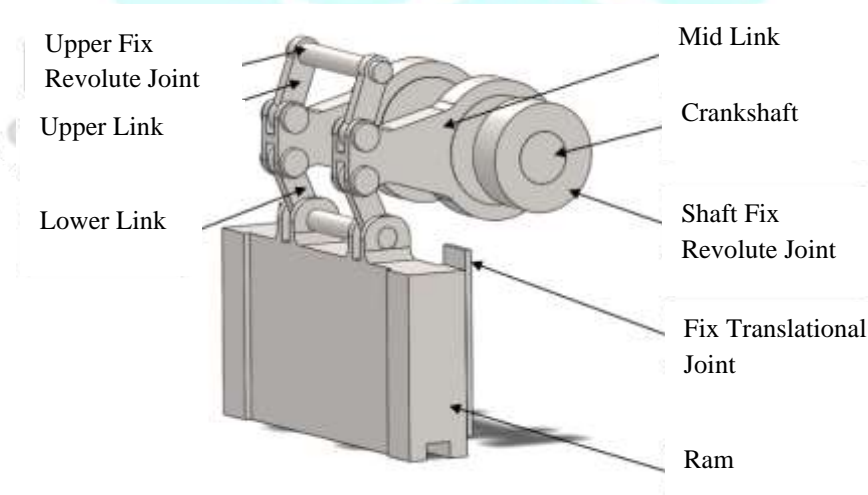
Crank-Slider Mechanism and Eccentric shaft
